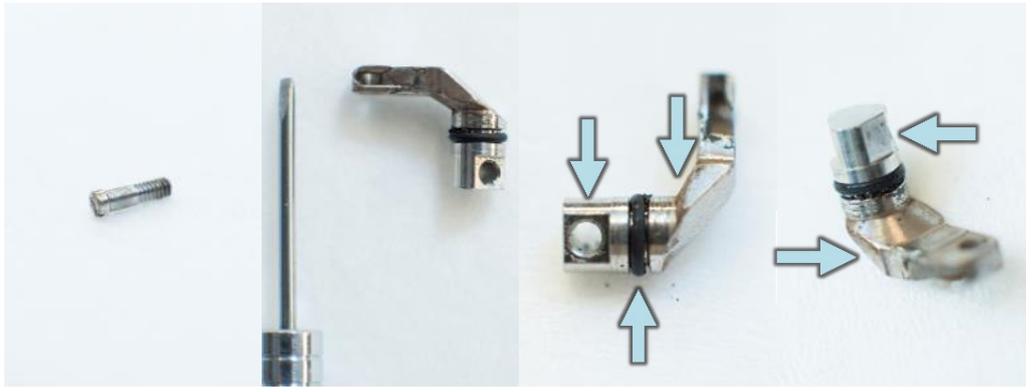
(from left to right) The screw that affixed the forceps elevator to the lever shaft; Lever with lever shaft and O-ring next to a 1mm diameter screw driver; Brown deposit on the lever, lever shaft and O-ring; Brown deposits on both drive section side (lower arrow) and patient side (upper arrow).
